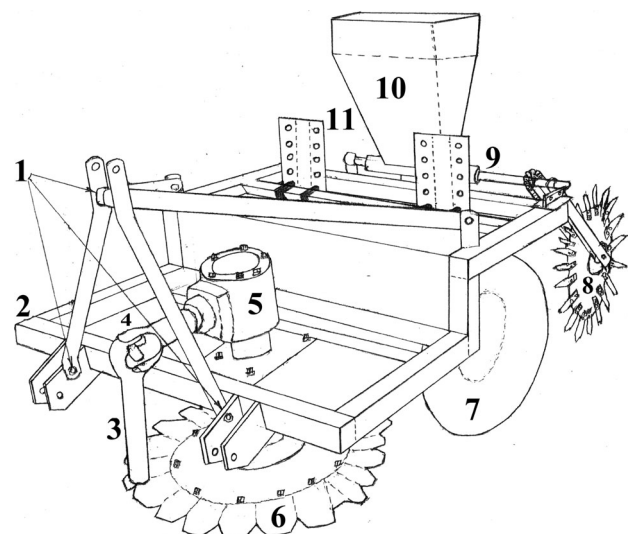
Schematic view of disc RMD. 1 Three point linkage, 2 main frame, 3 telescopic propeller shaft, 4 UJ cross, 5 heavy duty bevel gear box, 6 serrated (V-notch) blades mounted on disc, 7 tillage disc, 8 ground wheel with spikes, 9 metering auger, 10 fertiliser box, 11 MS plate
